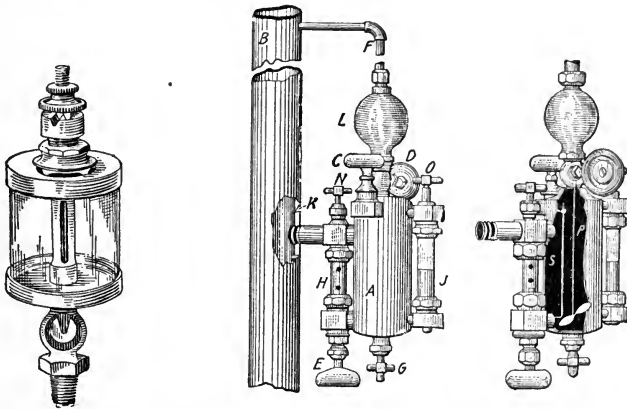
Sight-feed lubricator. FIG. 107.—Sight-feed automatic lubricator.
